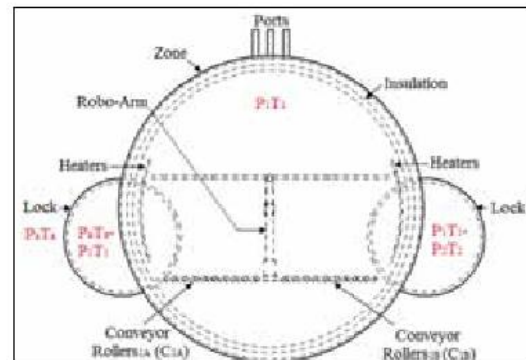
Front View of Single Cylindrical Zone with a Lock on either side
